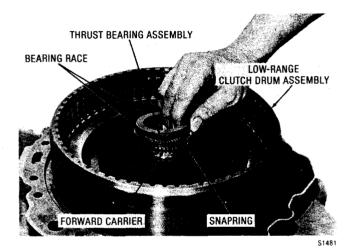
Installing needle roller thrust bearing assembly (TRT-3 overdrive)
